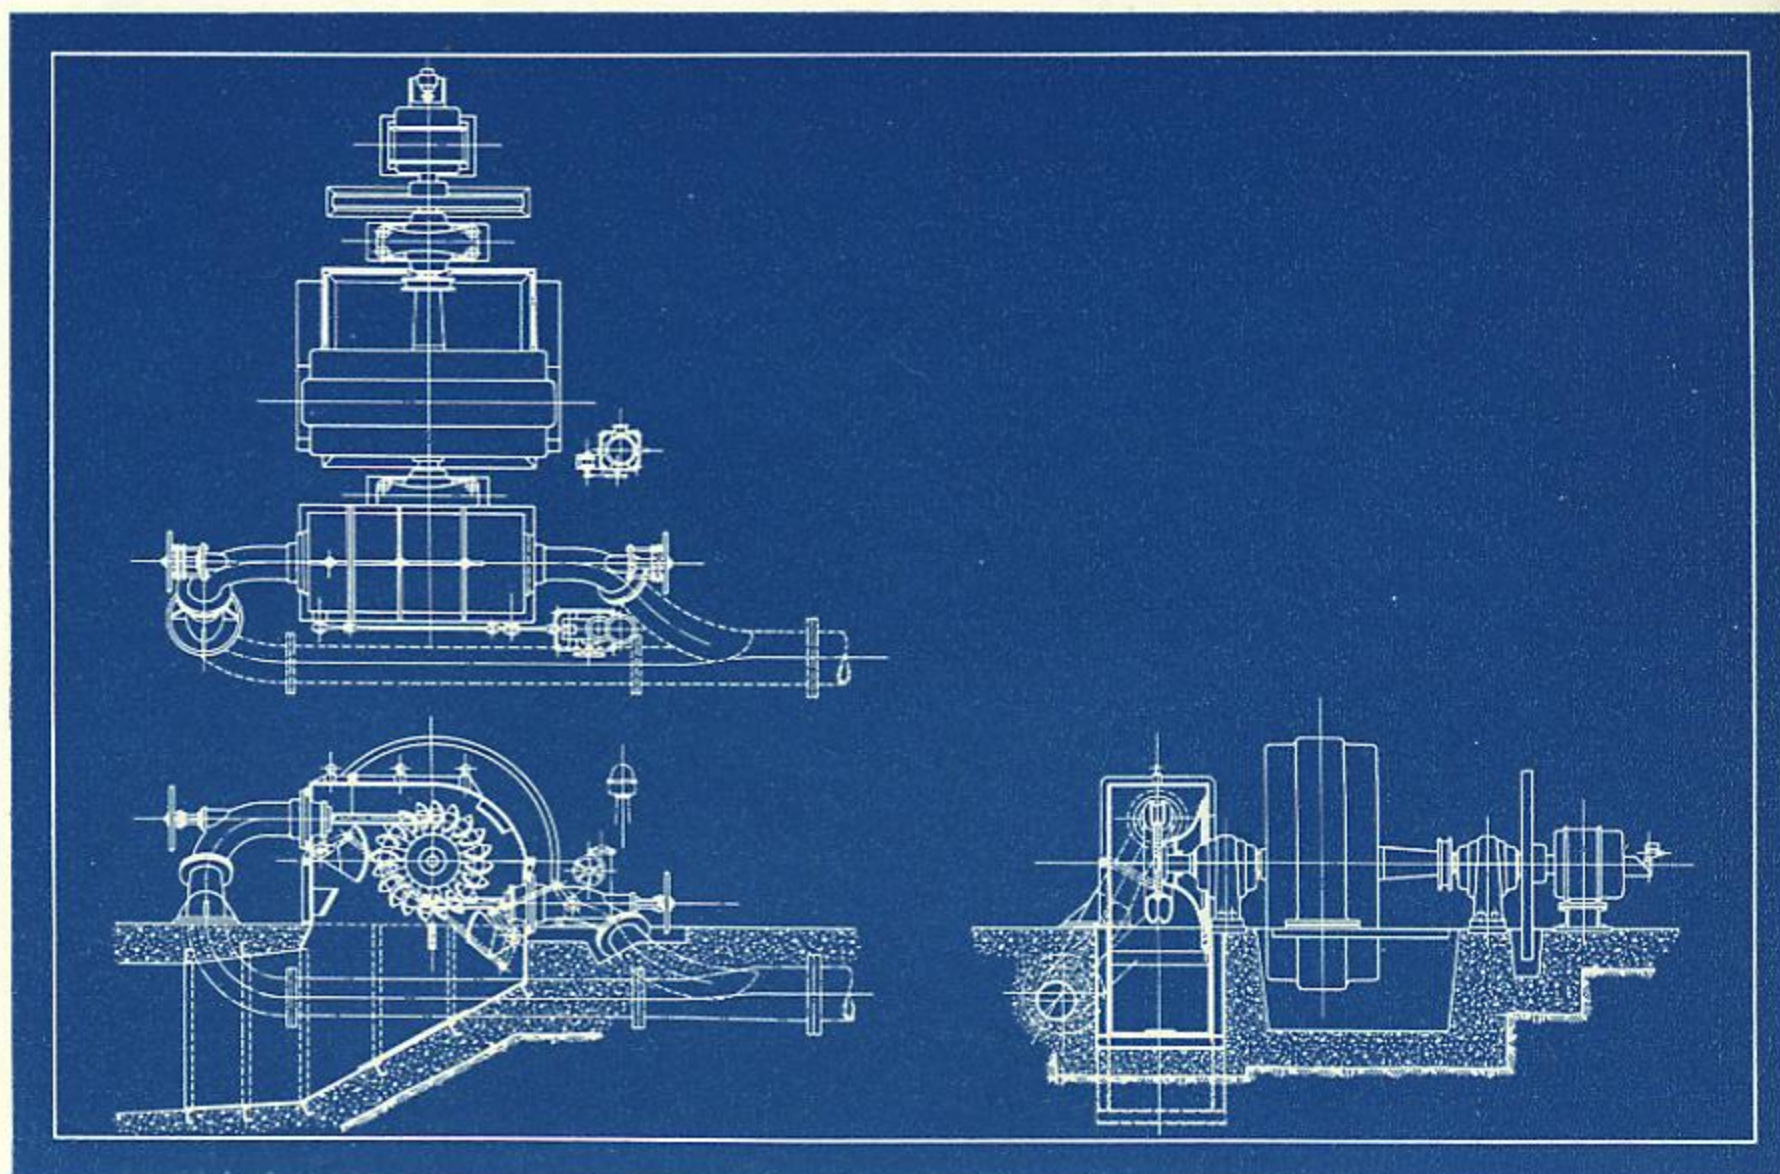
A single runner double-jet installation for larger capacities, frequently used to increase the speed 41% above that obtained by using a single jet as shown in Fig. 32, Pg. 23. A fly-wheel can be installed between the outboard bearing and exciter if very close regulation is required.
